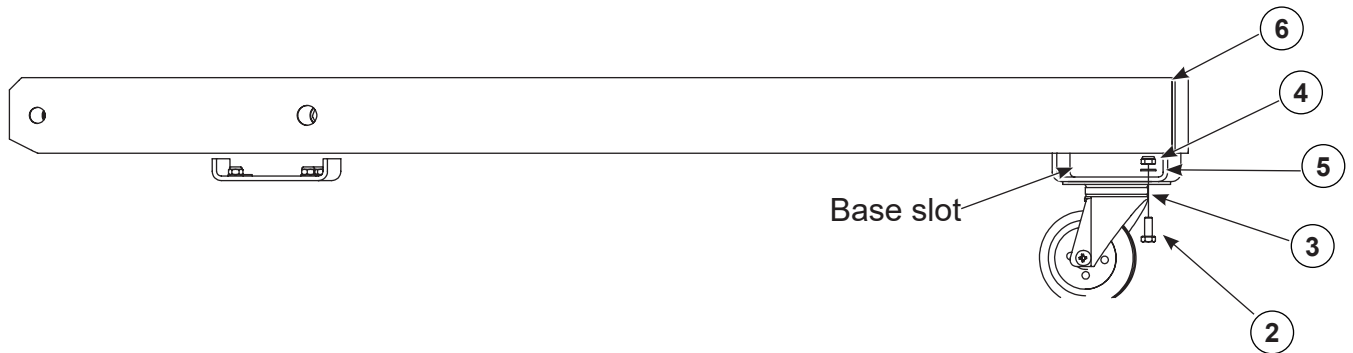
Caster Assembly Installation To Leg (2 of 2)
